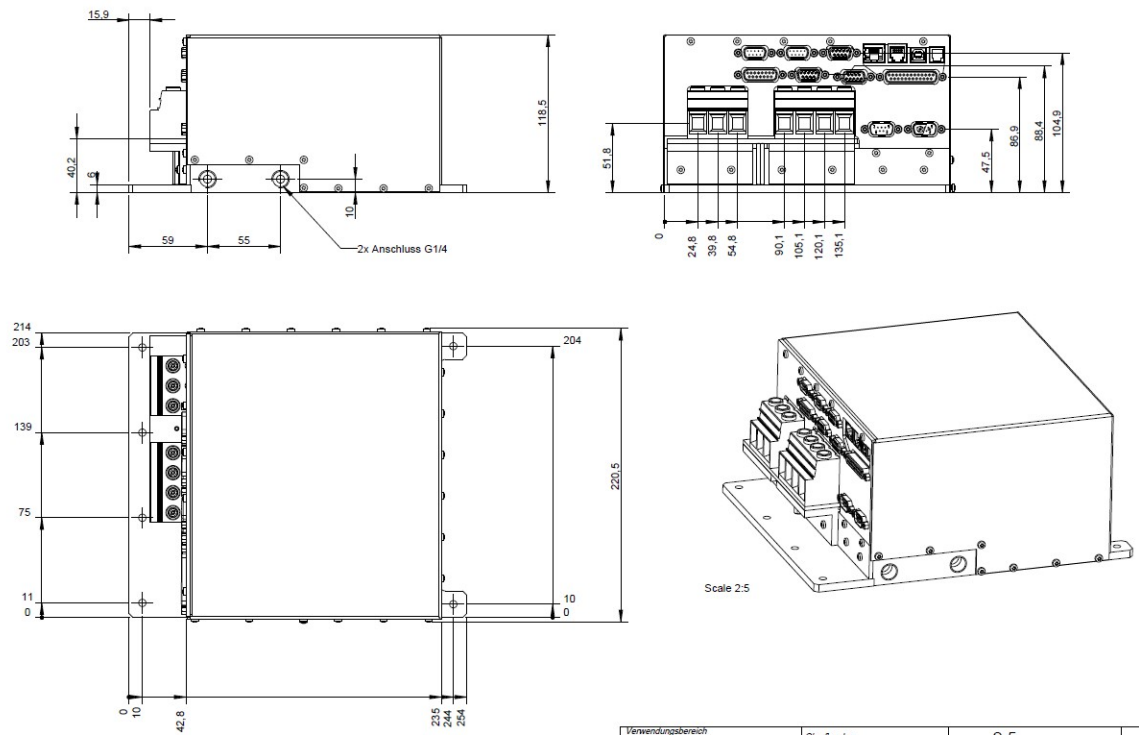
Mounting Drawing Base Plate SWM7/600-25-xx-WC
